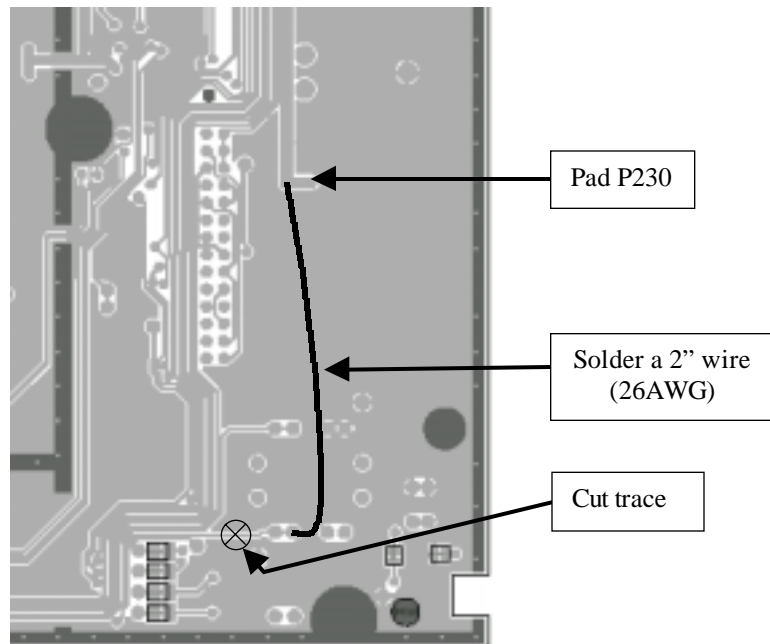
T857 Exciter PCB (rev 220-01398-(03A & 04)), Bottom side (EEPROM module) 2/2
